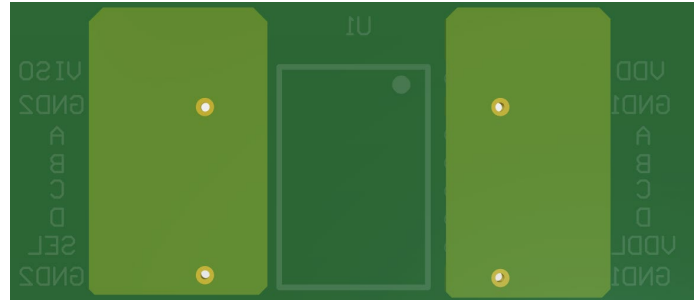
SOW16 Recommended PCB Layout — Bottom Layer
